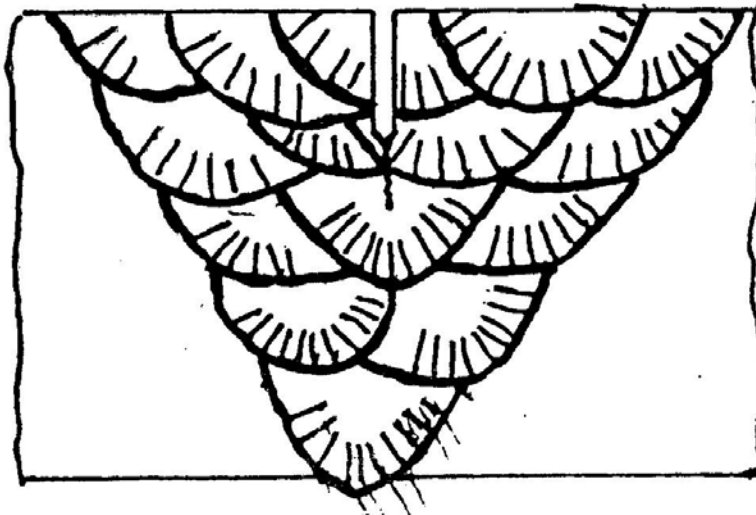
The propagating of fatigue crack in weld metal zone
